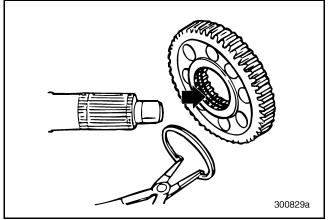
Installing Snap Ring into Lo-Speed Gear (T313L/T318L Shown)
